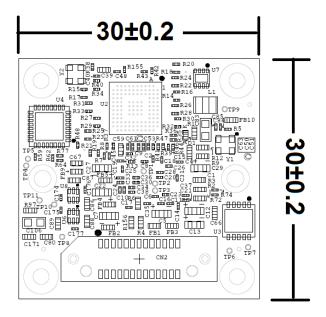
Rear View of e-CAM24\_CUNX Module Board Mechanical Dimensions
